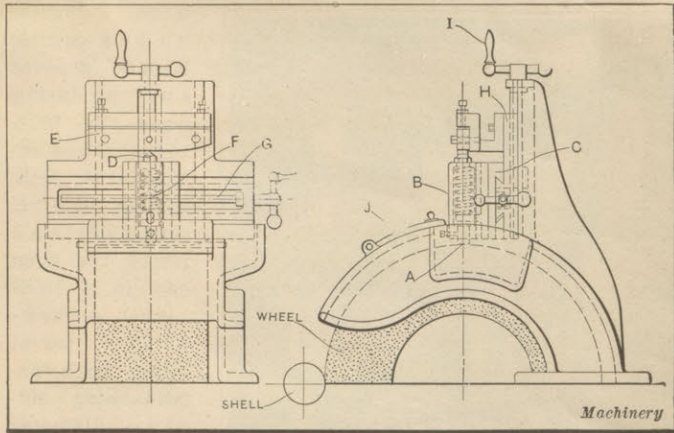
Special Type of Wheel Truing Device used on Ford-Smith Grinding Machine shown in Fig. 29
